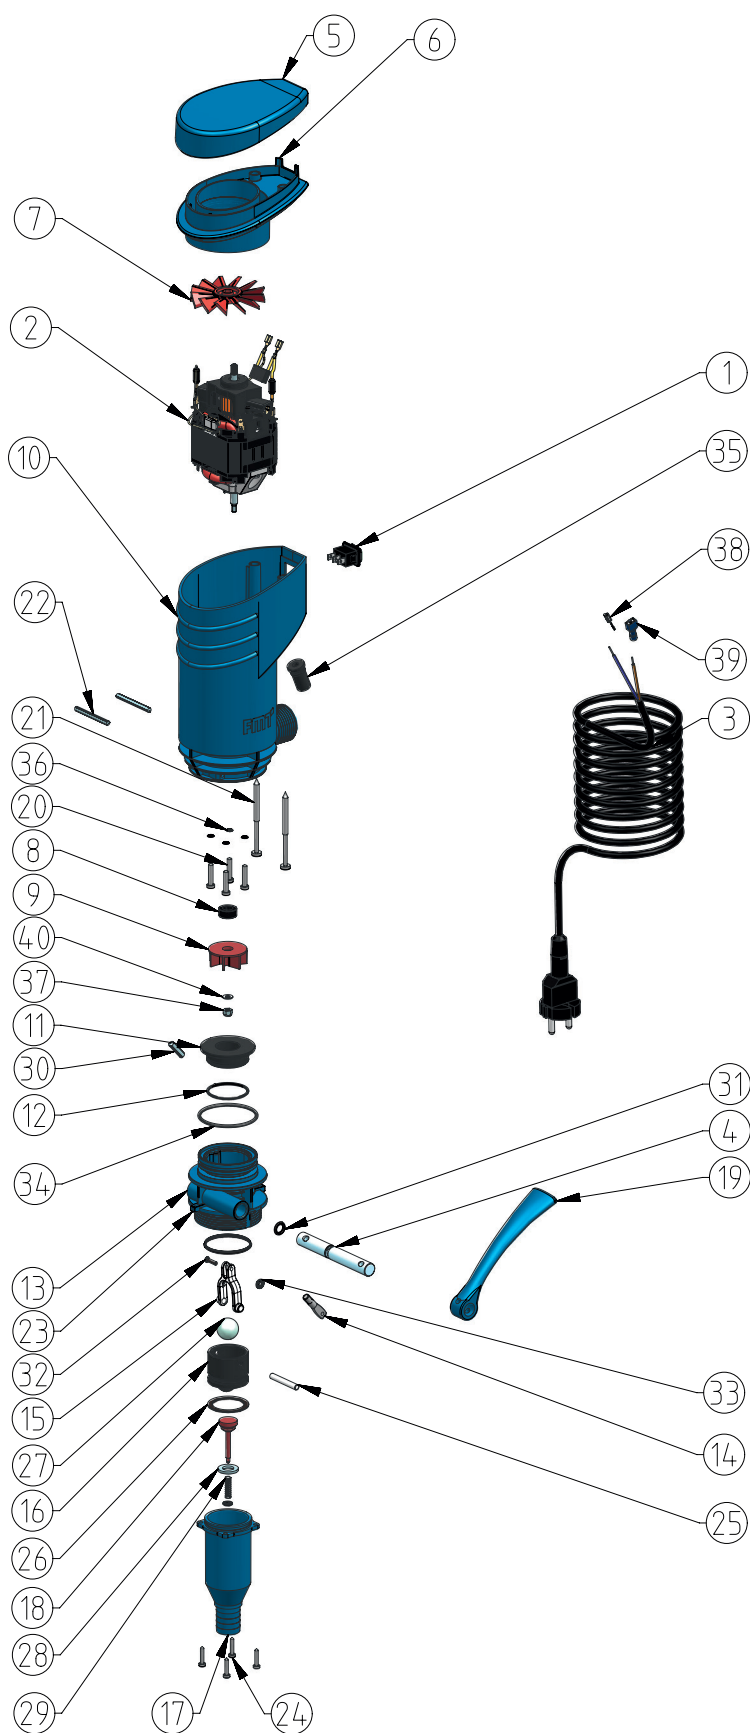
Exploded view of the PREMAxx DEF axial gear pump 230 V
